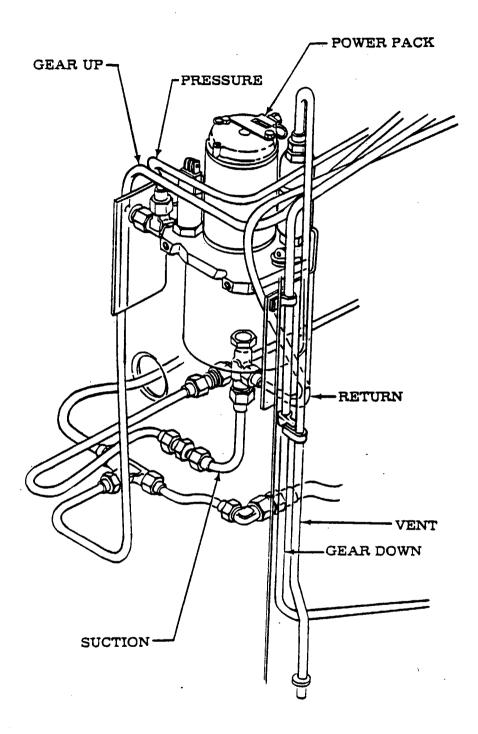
Landing Gear System Component Locator (Sheet 2 of 2)
